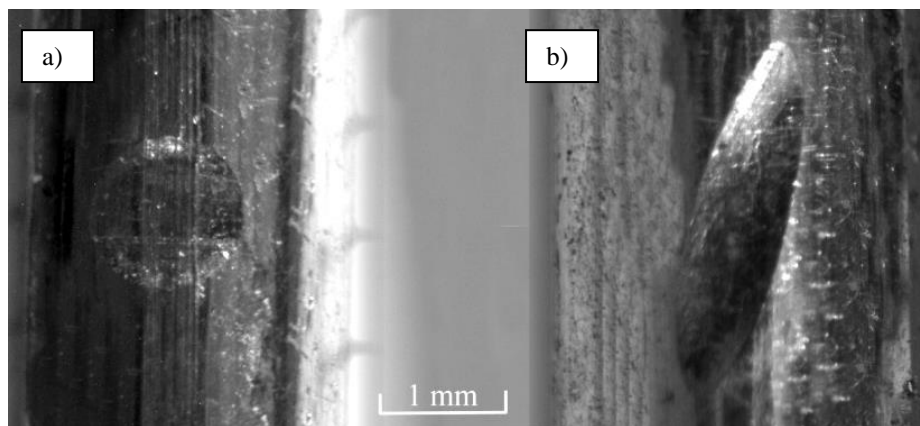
Imprint aspect: a) at 90°; b) at 30°
